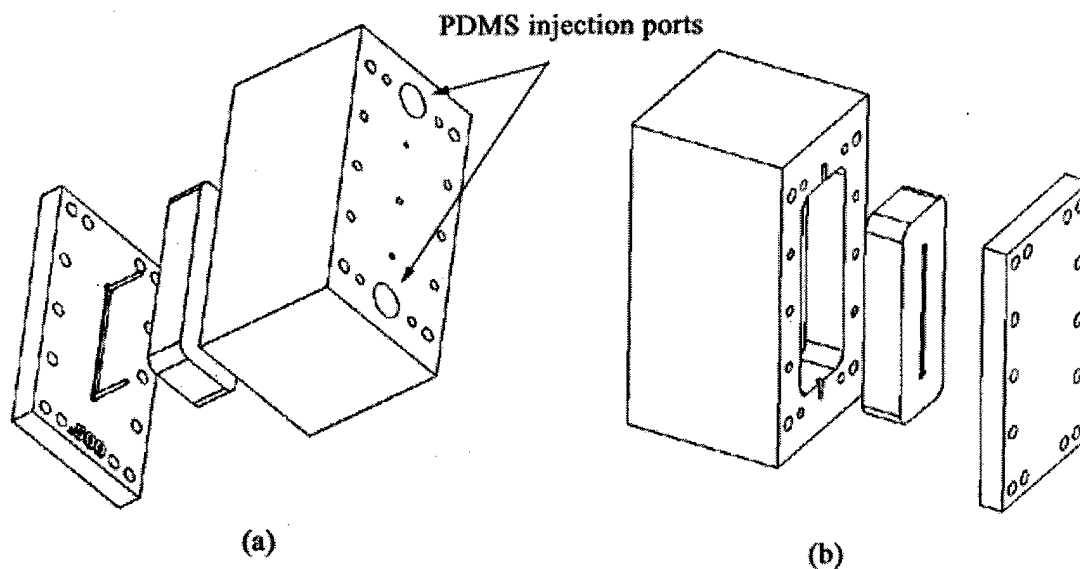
Two different views of the mold system composed of the polyurethane mold bottom, the cast PDMS microfluidic device, and the 6061 T-6 aluminum mold top.
